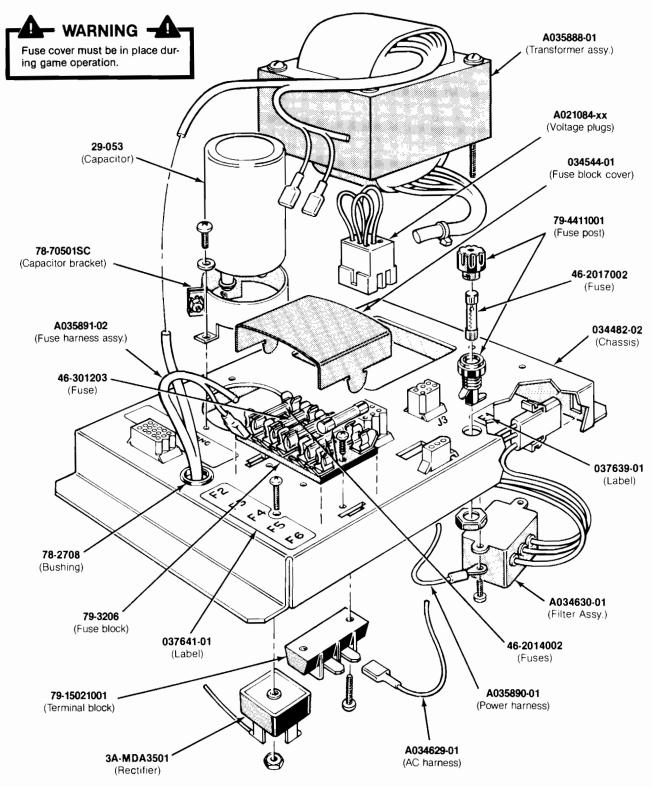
Power Supply Assembly A037671-01 and -02 C
